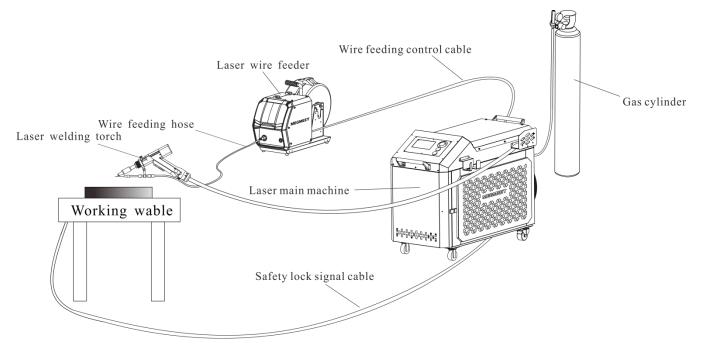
Connection diagram of Lux-3000 hand-held fiber laser welding system
